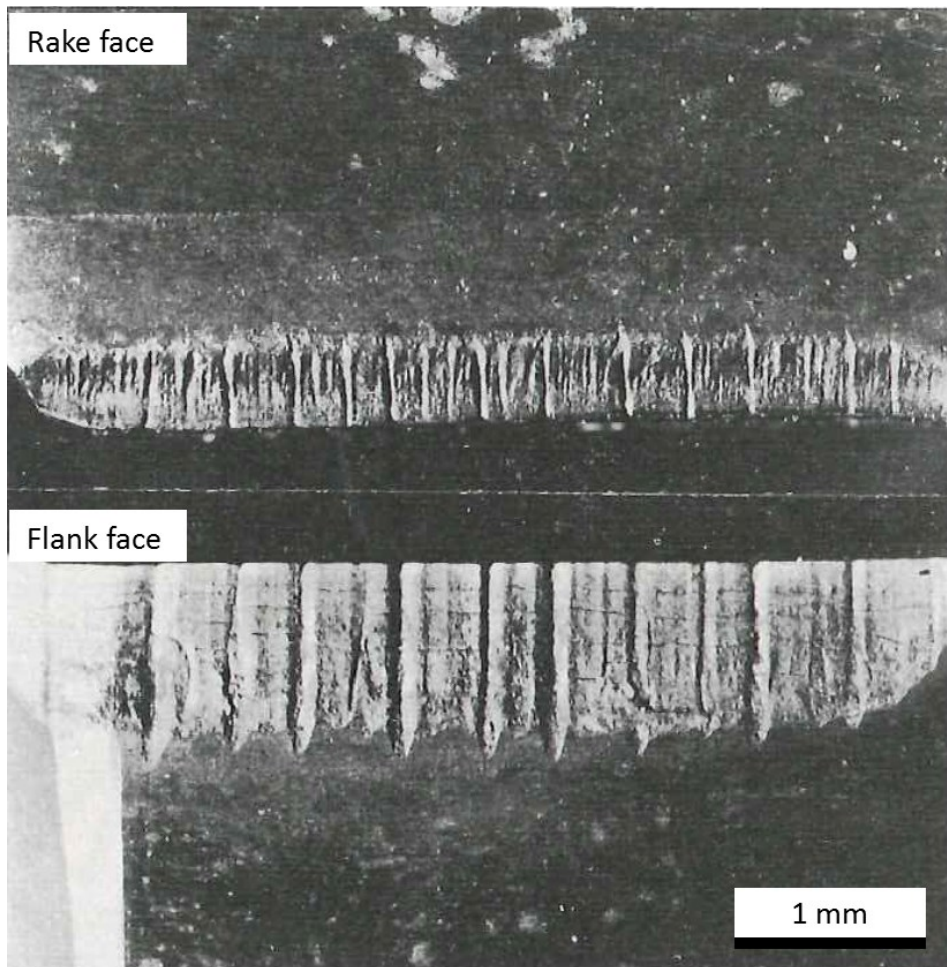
Rake and flank face of a milling insert at the end of lifetime. During cutting the workpiece material slips from the cutting edge over the rake face, the plane perpendicular to the rake face is indicated as flank face. Combcracks propagate perpendicular to the cutting edge. Adhesive and abrasive wear marks are visible [5].
